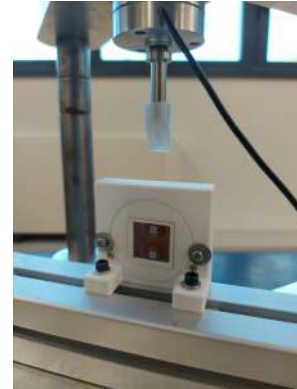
Complete setup for Shear Testing the soldered dies.
